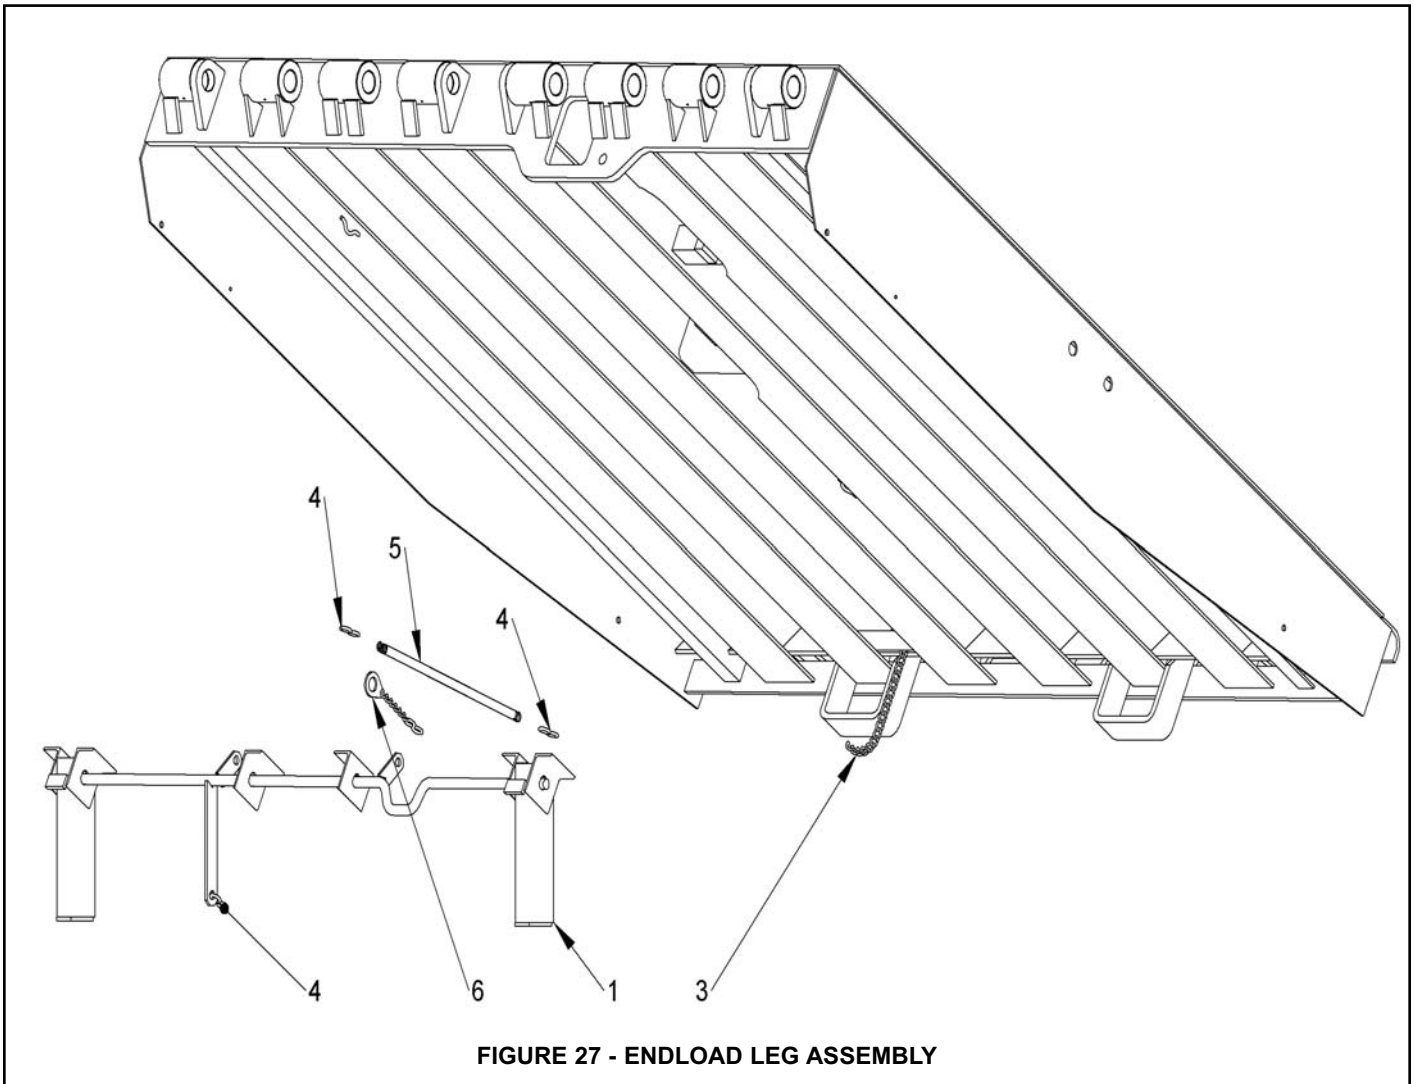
ENDLOAD LEG ASSEMBLY
